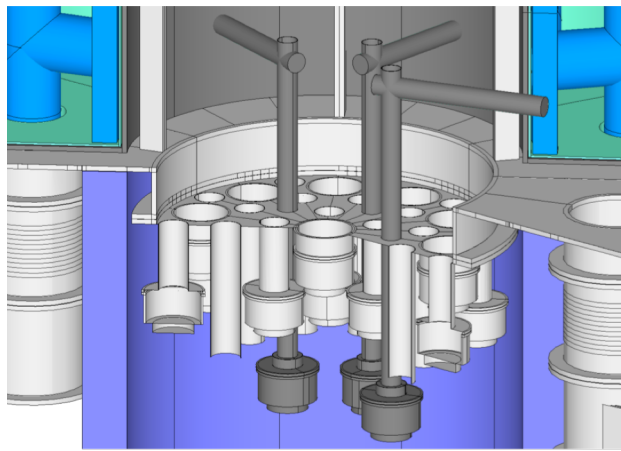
A close-up view of the TMP assembly. Black TMPs are connected to the HTS-CS cryostat.
